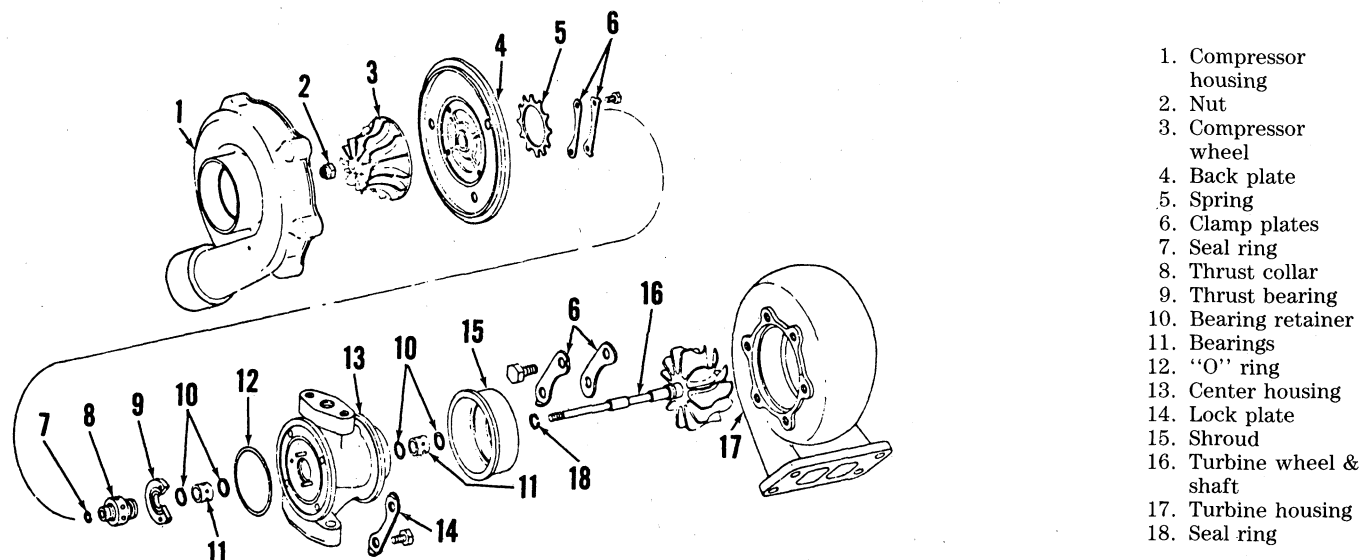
Exploded view of AiResearch Model T04B turbocharger used on some models.
